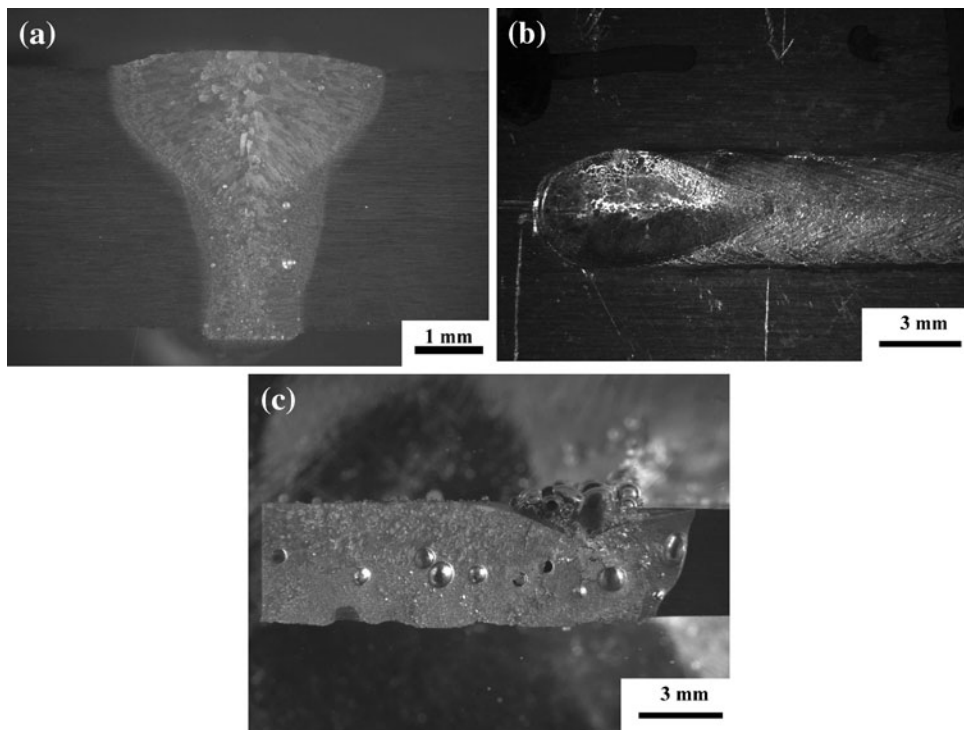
Laser beam weld of Al 2198-T8 for energy deposition of 103 J/mm and beam focal point at 1 mm below top surface of workpiece. (a) Transverse cross section. (b) Top surface of workpiece. (c) Longitudinal cross section at symmetry plane. Beam power and welding speed are 3441 W and 2 m/min, respectively
